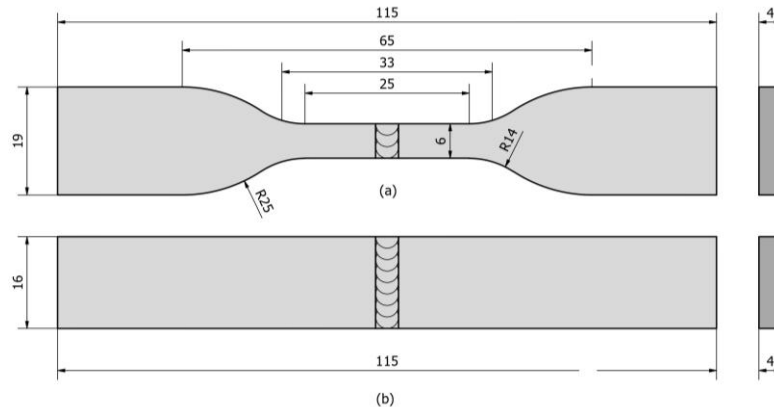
(a) Dimensions of tensile test specimens, (b) Dimensions of bending test specimens
